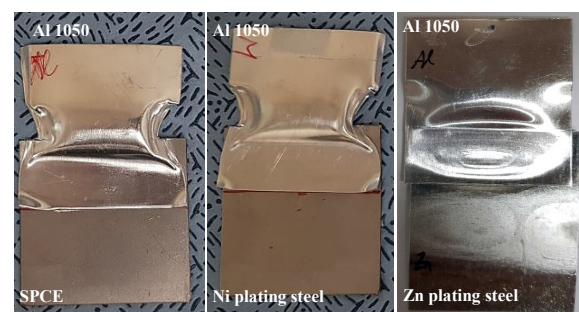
Specimens after electromagnetic pulse welding process under 40kJ heat input
